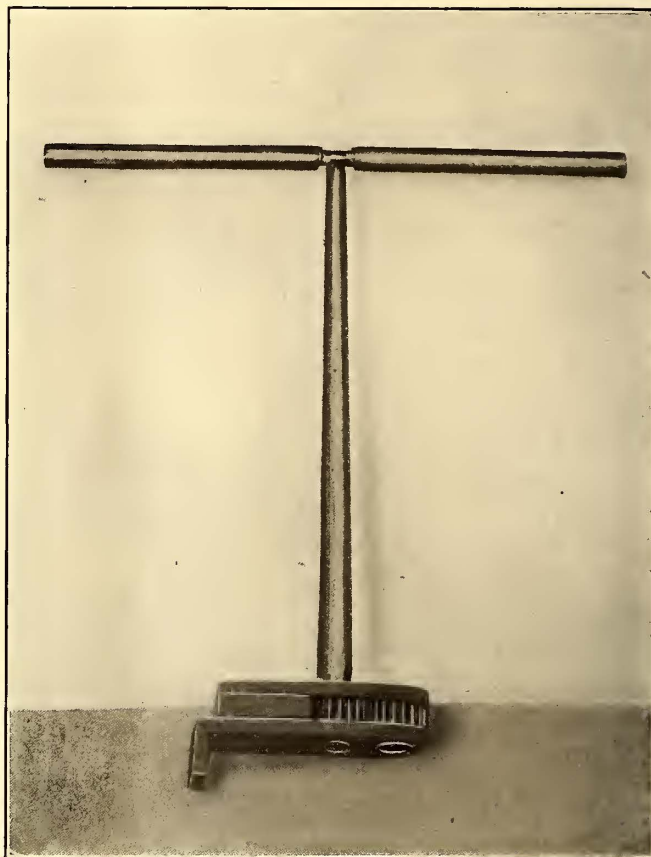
EXTENSION SOCKET WRENCH FOR TIGHTENING NUTS ON SPLIT GEARS
